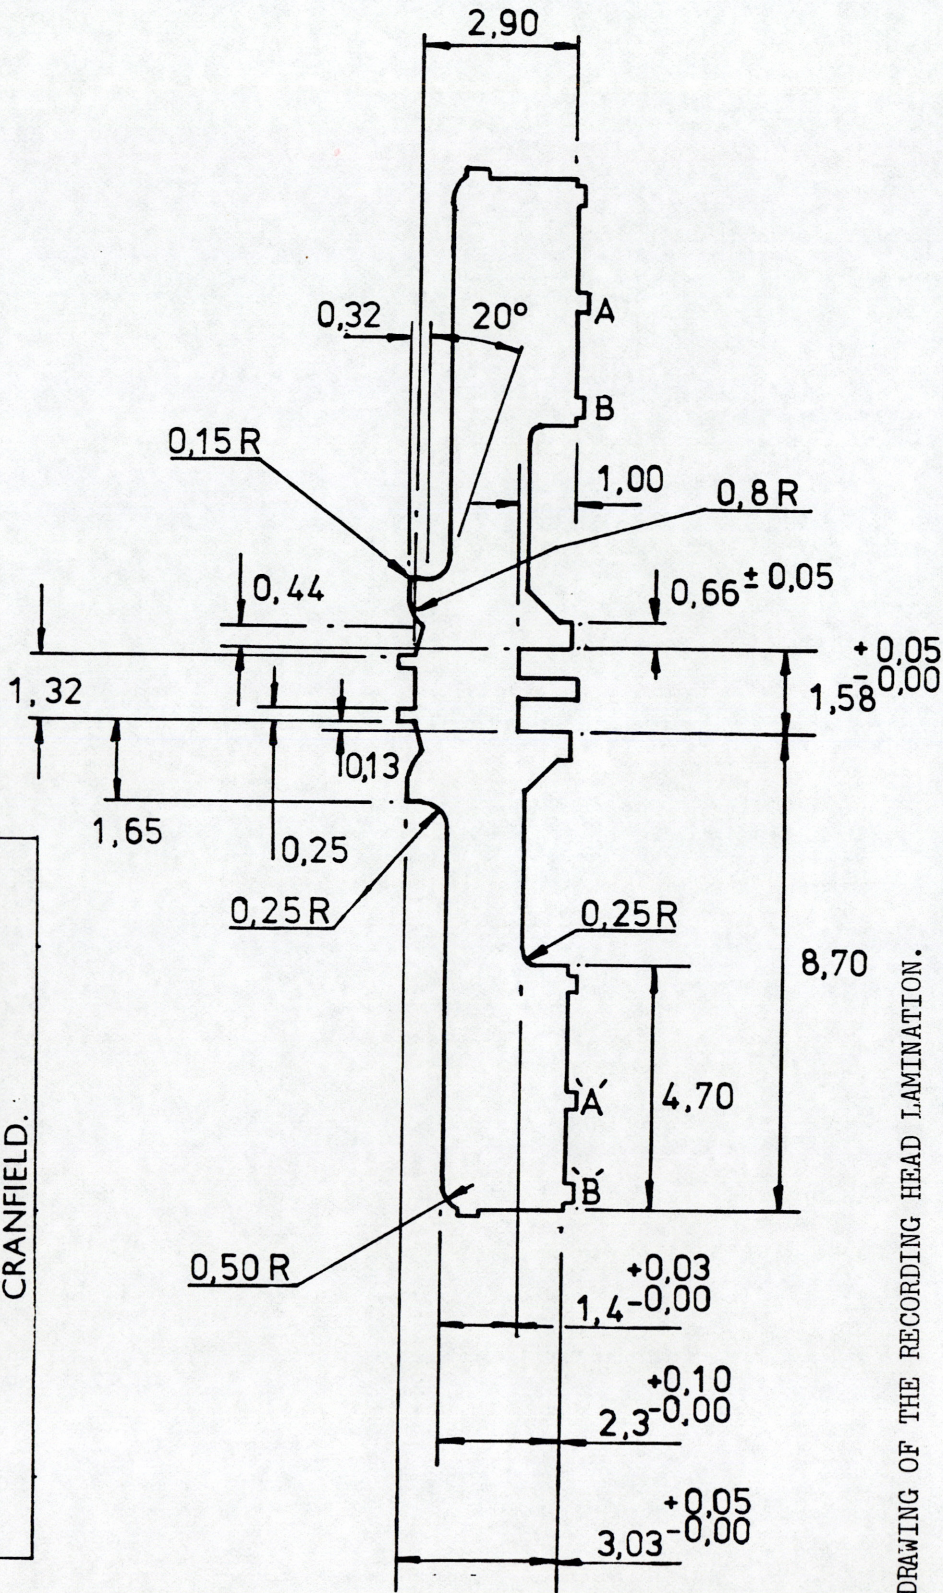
DRAWING OF THE RECORDING HEAD LAMINATION.
